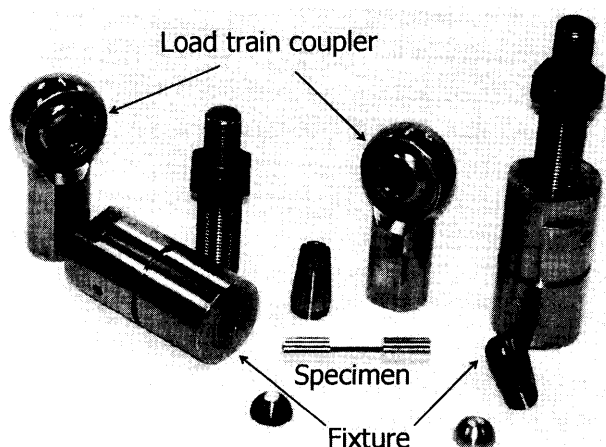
Fixtures and specimen for tensile testing of SiC/SiC composites.
